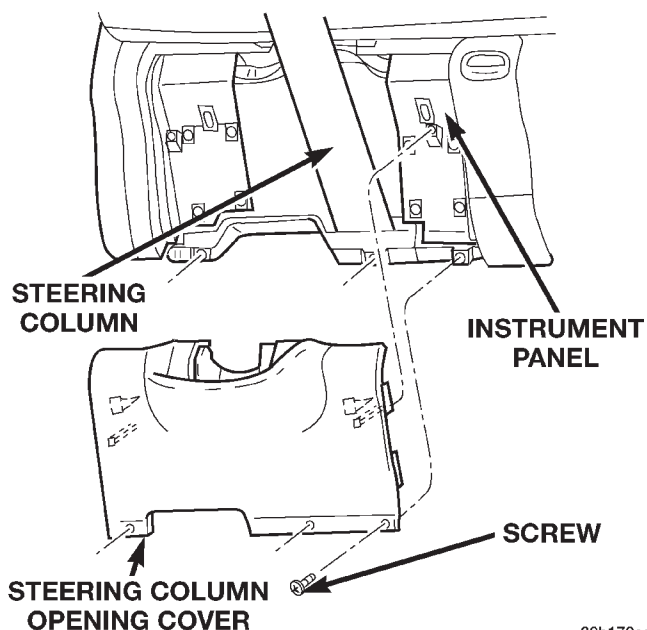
Steering Column Opening Cover and Knee Blocker Remove/Install
